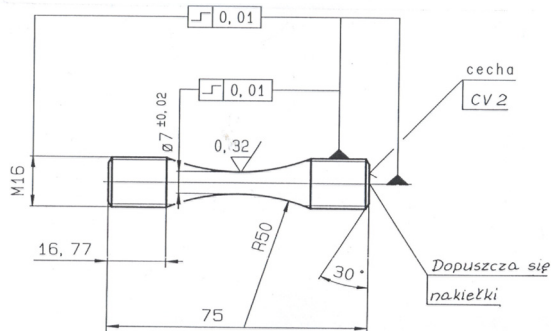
Shapes and dimensions of specimens for low-cycle fatigue (LCF) testing
